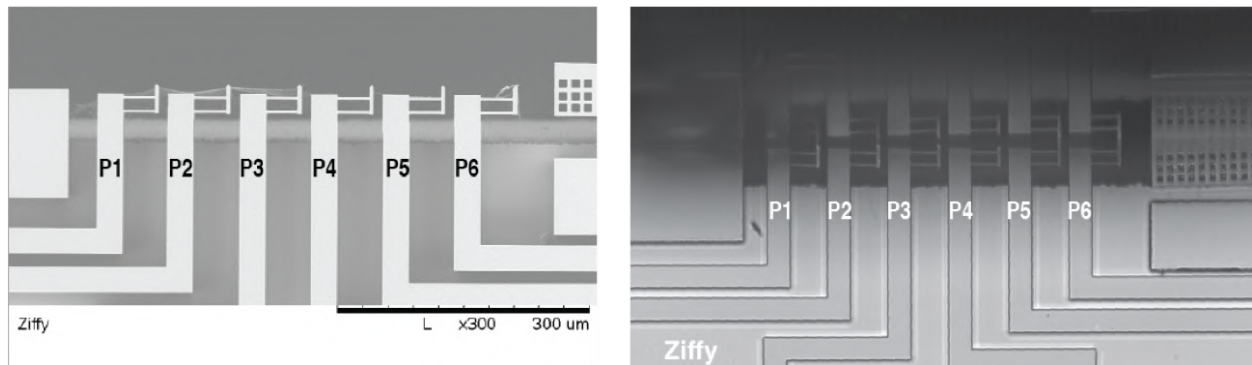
A top down microscope image of the six probes in the ZIF socket used to electrically connect to the motor chip. Left: the probes before assembly. Right: probes after assembly.
